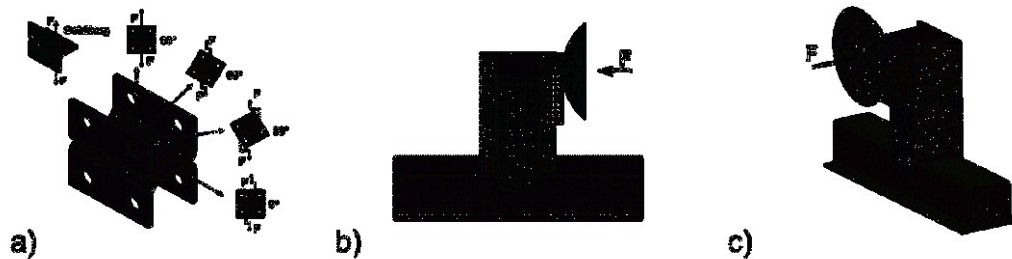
a) KS-2 specimen [5] b) T-joint quasi-static longitudinal loading c) quasi-static transverse load
